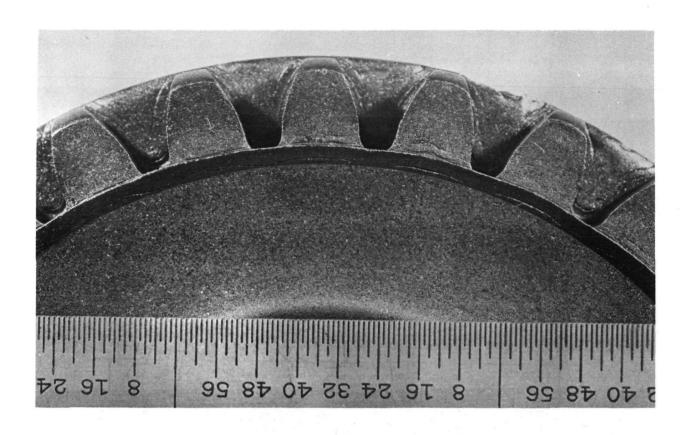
Macro of Ausformed Gear Teeth. Note Minimal Scallop Configuration in Bottom Radius
